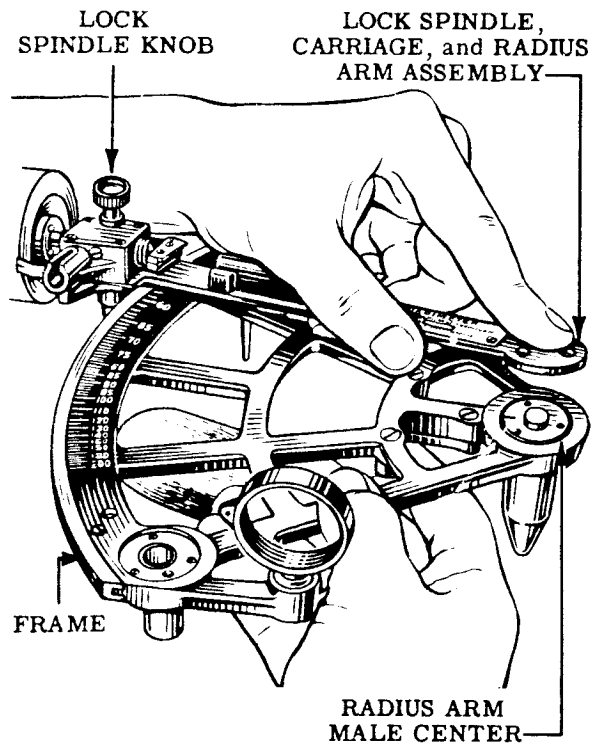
Removing the Lock Spindle, Carriage and Radius Arm Assembly (Sheet 1 of 2)
